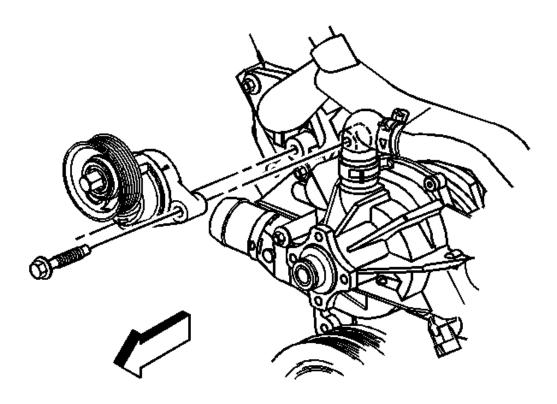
View Of Accessory Drive Belt Tensioner Courtesy of GENERAL MOTORS CORP.
